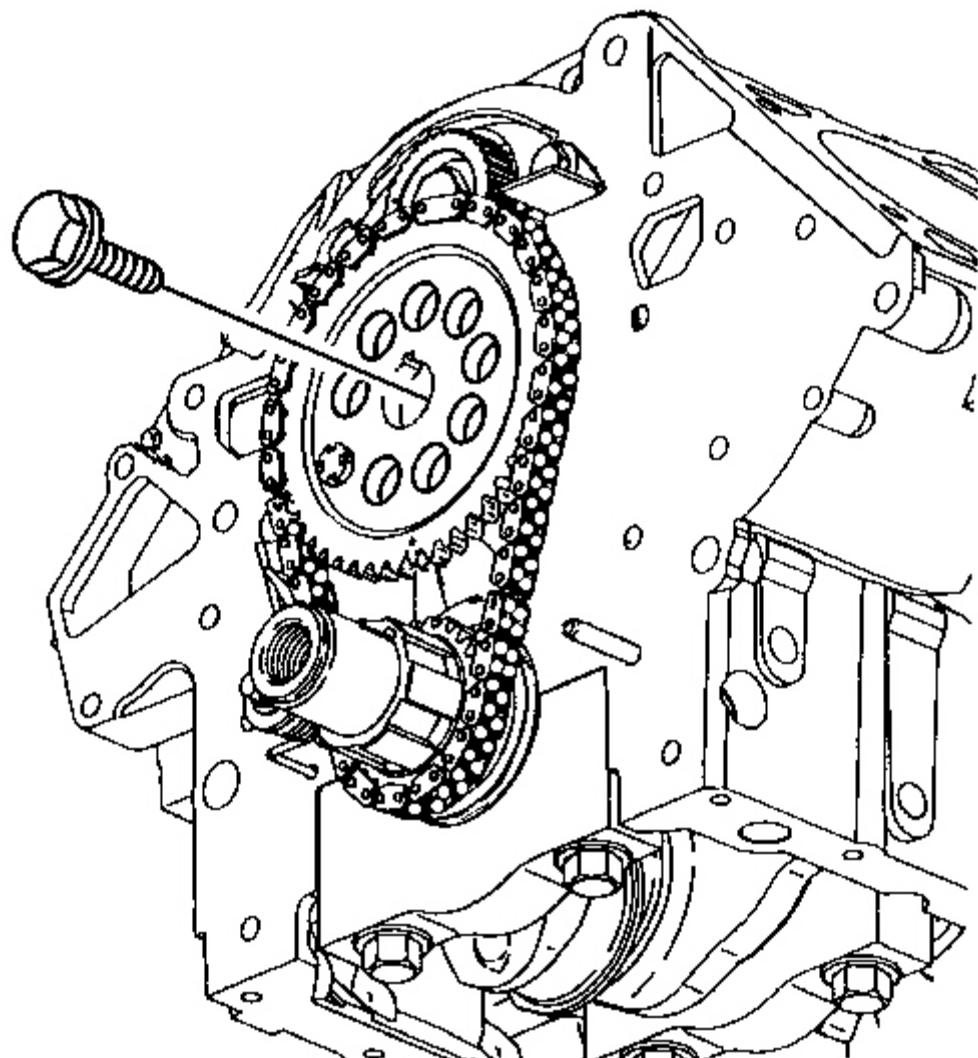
Locating Camshaft Sprocket & Timing Chain
